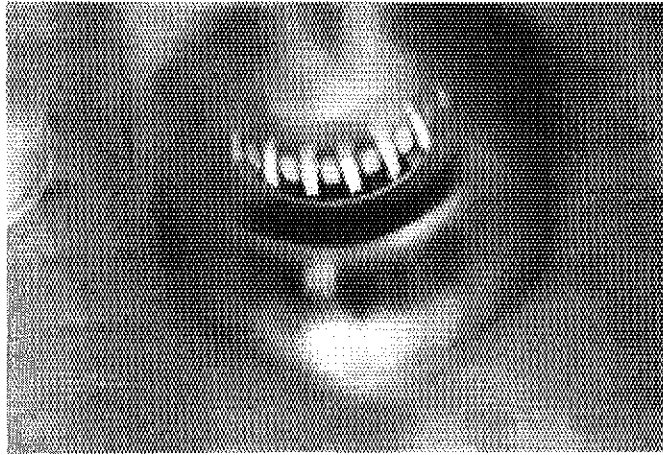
A photograph of the Ag-coated roller bearings taken after the repetitive motion experiment.
